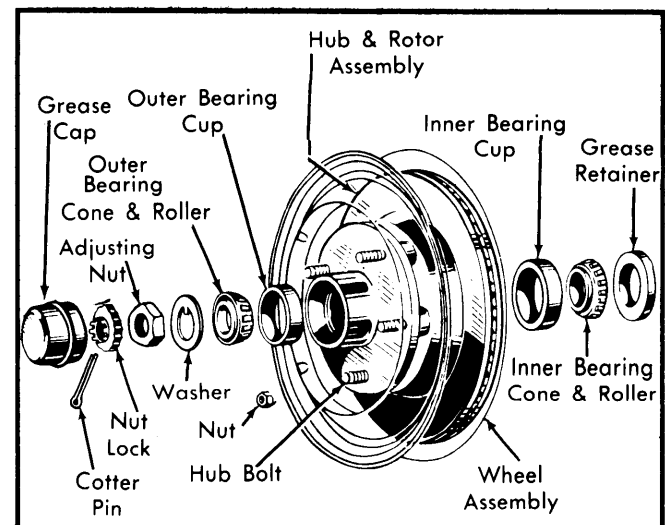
Exploded View of Wheel Bearing Components with Disc Brakes
